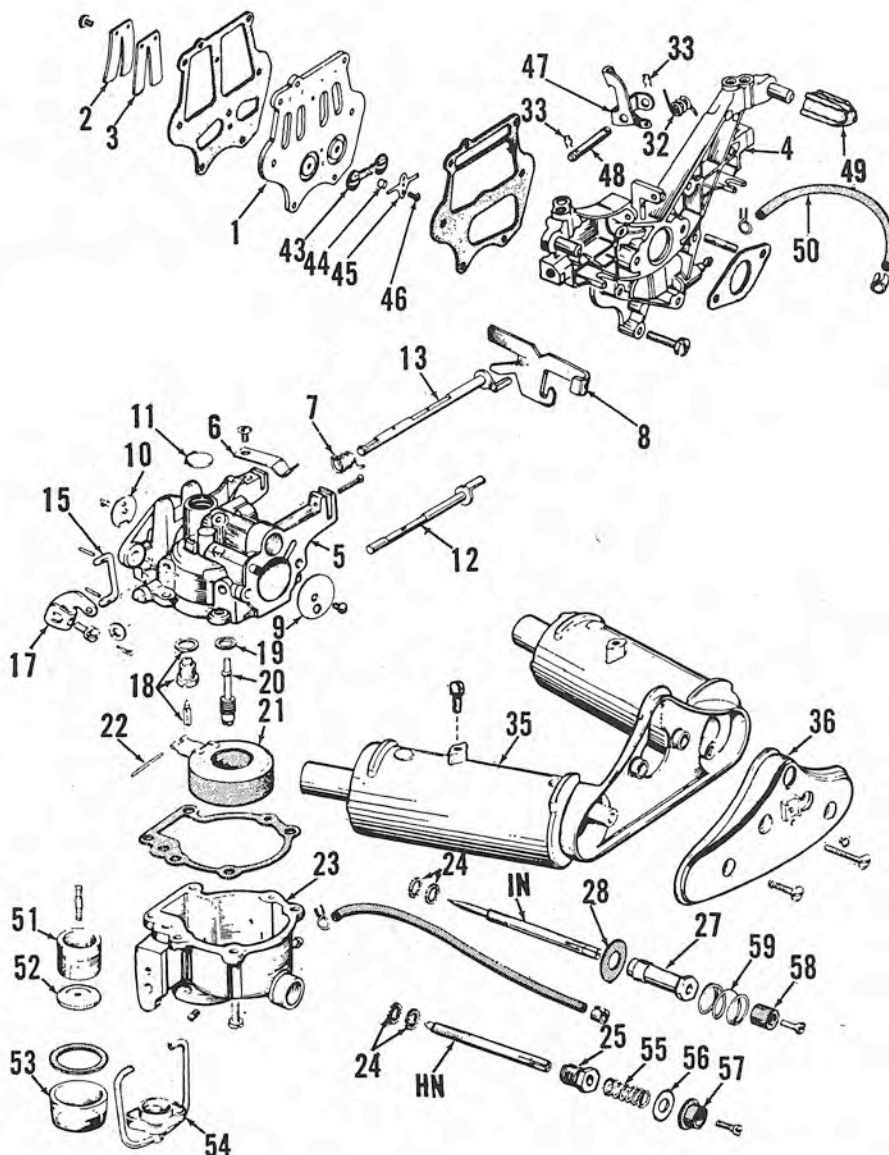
Exploded view of series AD carburetor, silencer and reed valve assembly. Fuel tank pressurizing check valves are shown at (43). Refer to legend under Fig. J2 except for the following.
